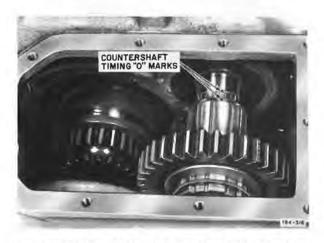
Aligning Timing "O" Mark on Rear Countershaft with Front Countershaft
